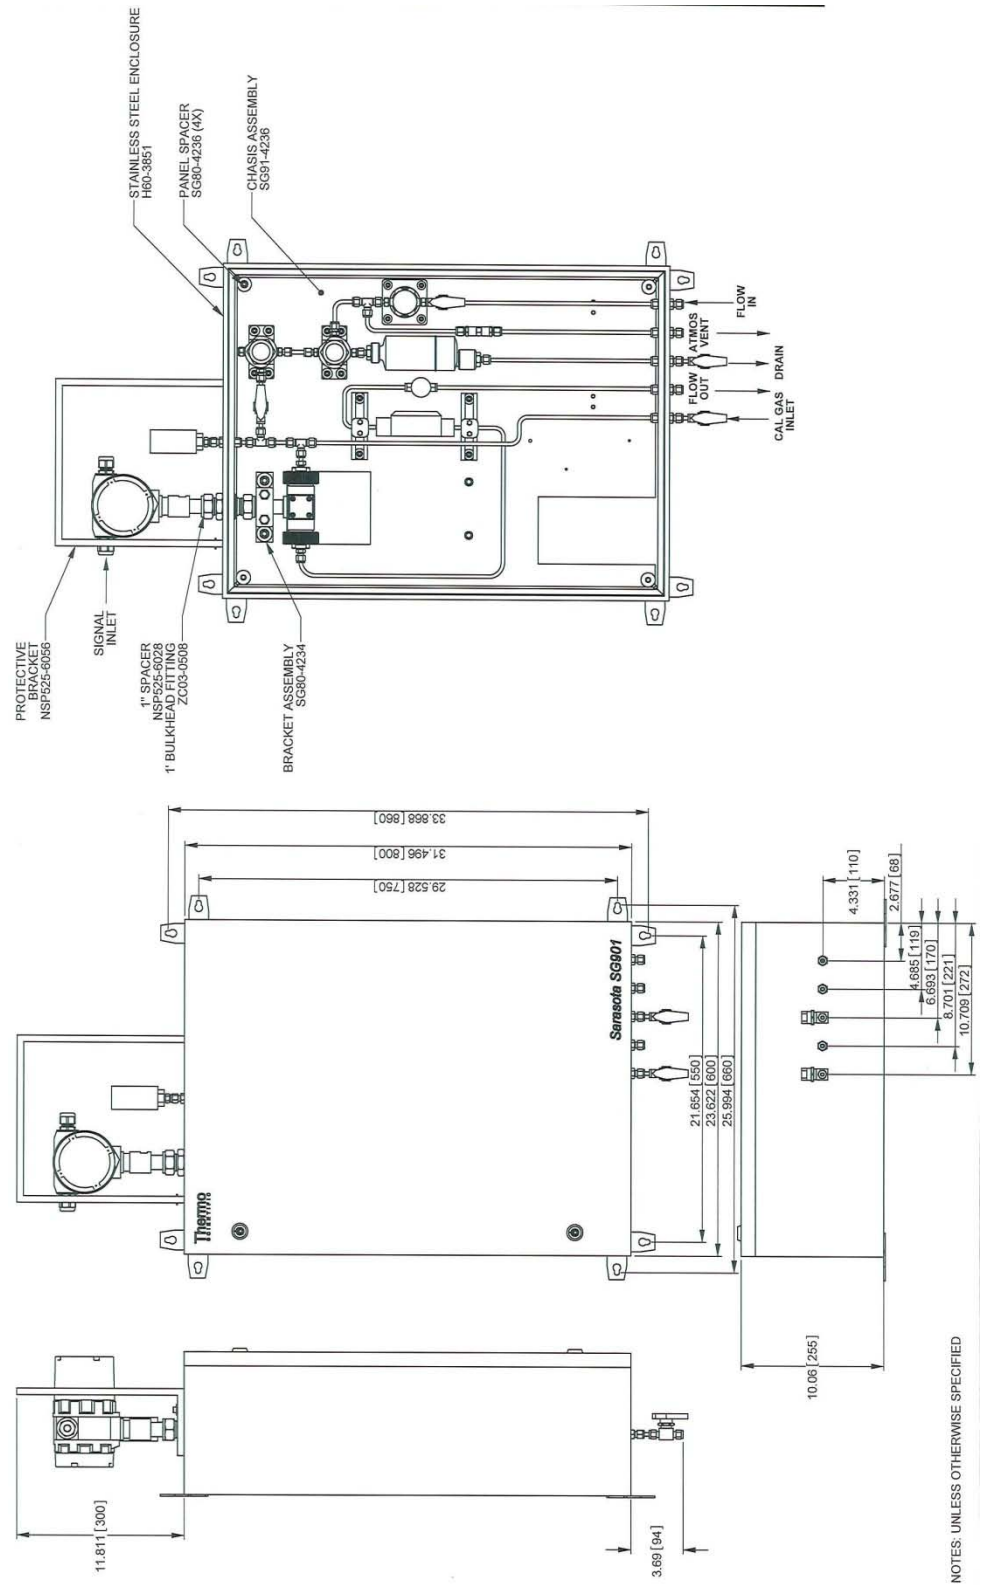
SG91-6002: General assembly drawing, basic gas system (sheet 2 of 3)
